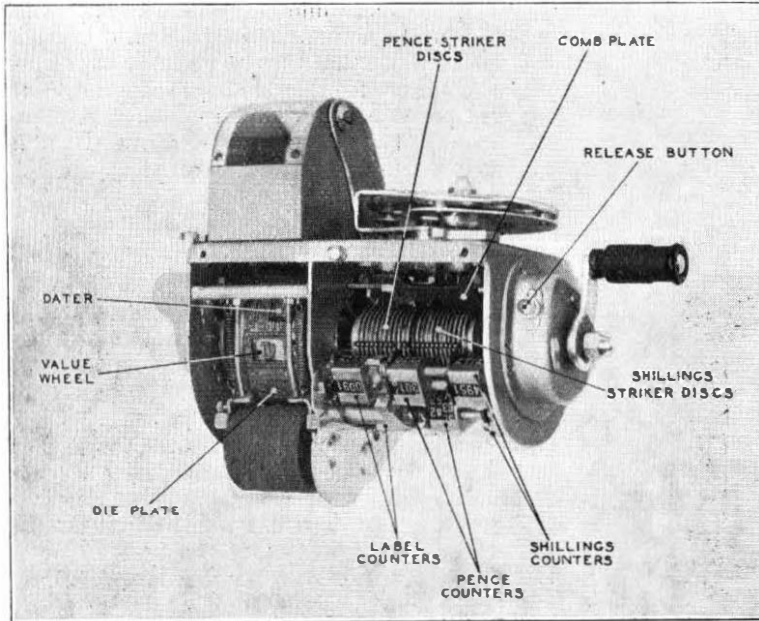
VIEW SHOWING VALUE SELECTION AND PRINTING MECHANISM.
